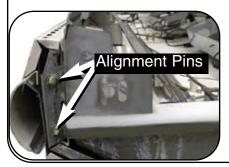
Checking Alignment Pin and Light Rail Joining Bracket
